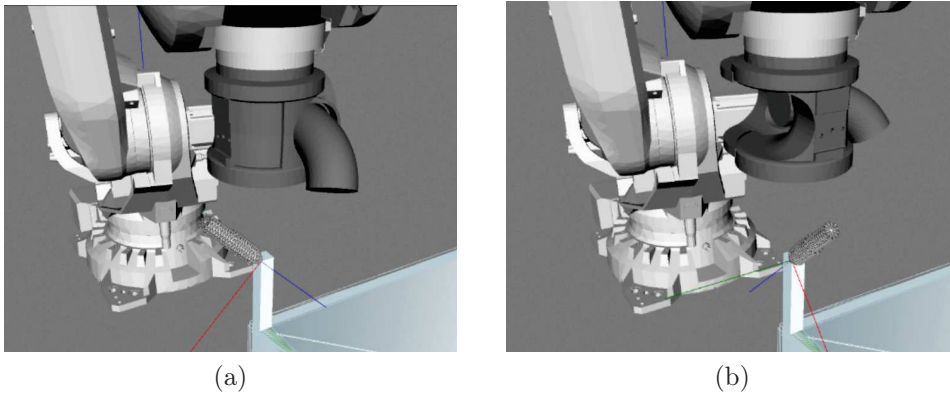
Start and end points of the 90° welding trajectory. No connection between flange and tool is shown for clearness
